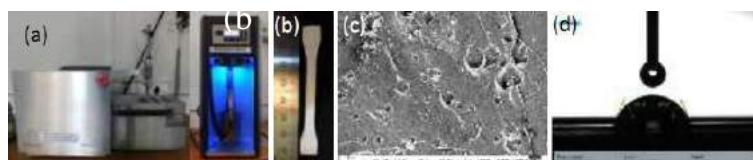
Extrusion cum Injection moulding machine, (b) fabricated composites (c) cross-sectional surface image from FESEM, (d) Contact angle of the PLA/nHAp
